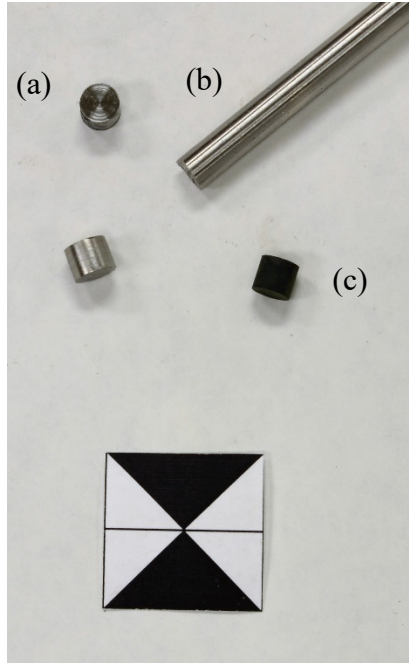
Wrought IN625 Compression Test Samples: (a) machined, not annealed, (b) round bar stock, (c) machined and annealed
